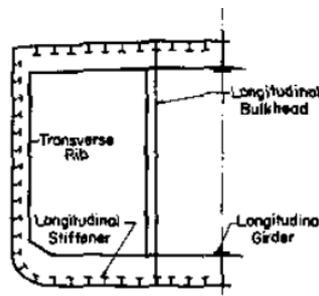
Typical cross section of ship hull (Ostapenko, 1981)
